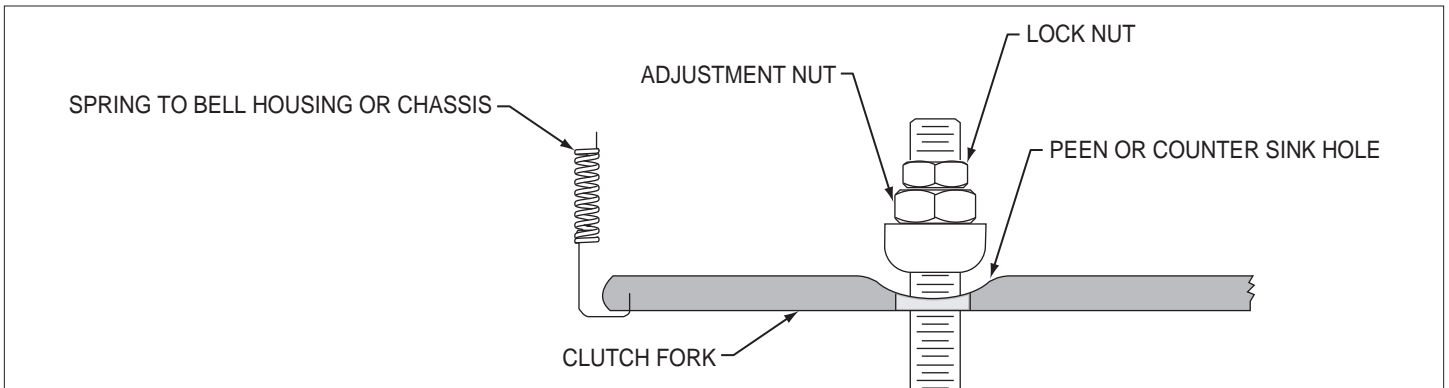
Clutch Fork Hole, Peen or Counter Sink
